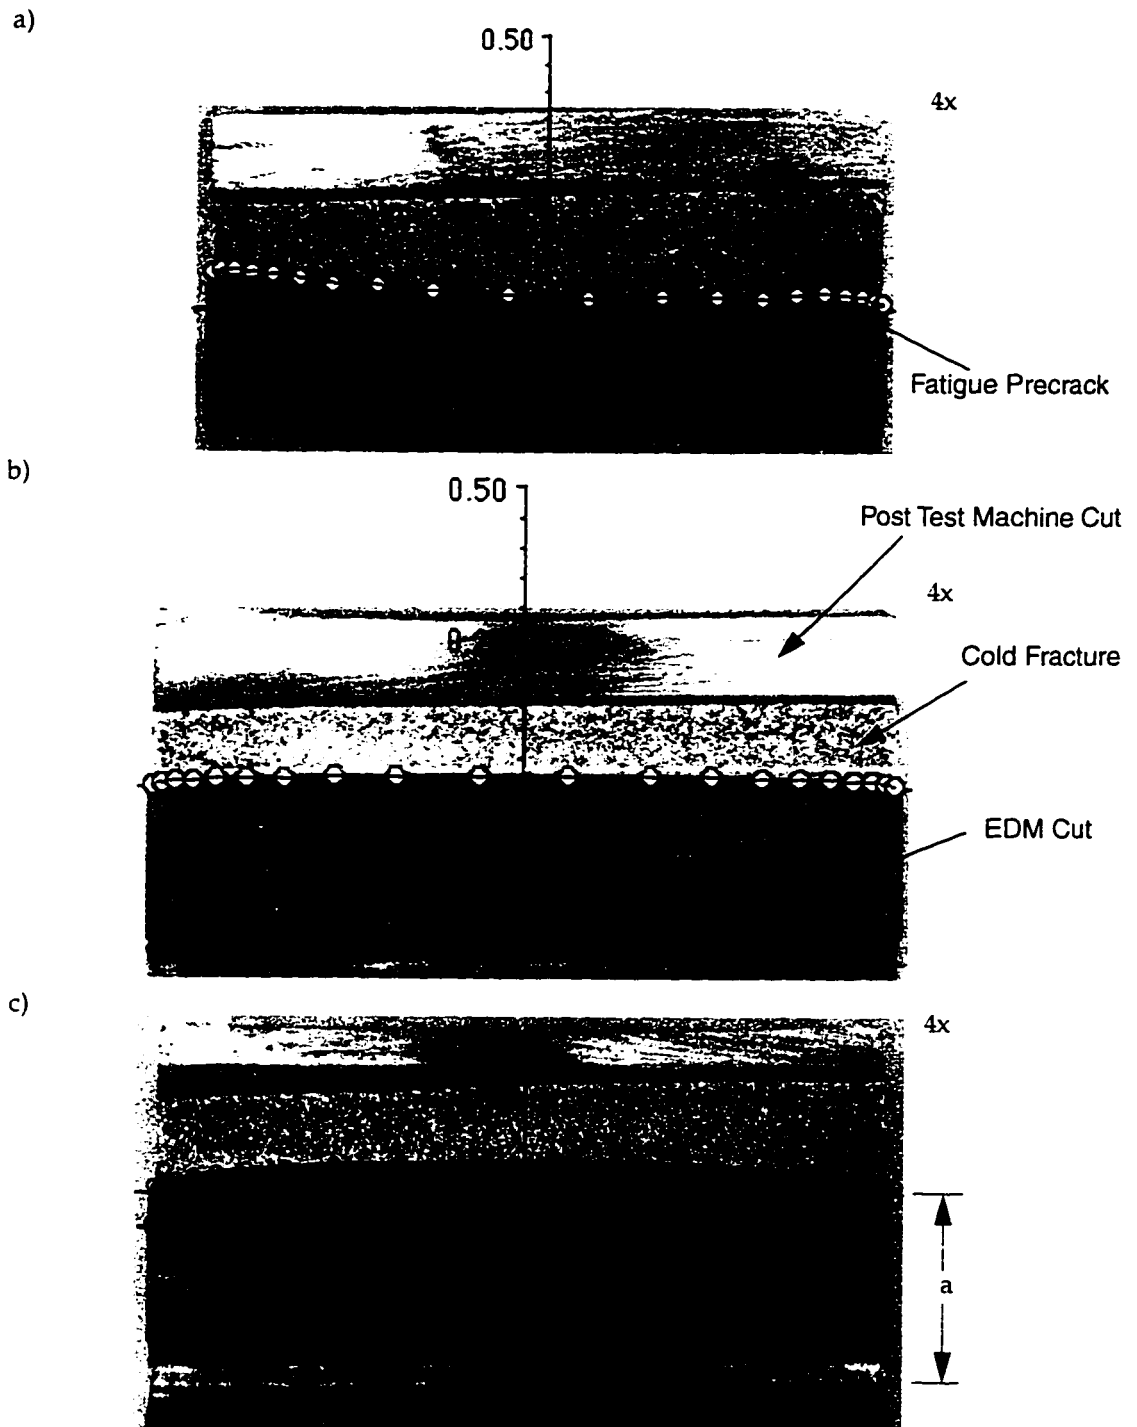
Center cracked panel predicted crack front superimposed on actual fracture surfaces (Only one crack tip shown). a) Fatigue cracked front, 0.04 inch (1.01 mm) CMOD, b) EDM notched crack front, 0.045 inch (1.14 mm) CMOD, c) EDM notched crack front, 0.06 inch (1.52 mm) CMOD. Dimensions in inches.
